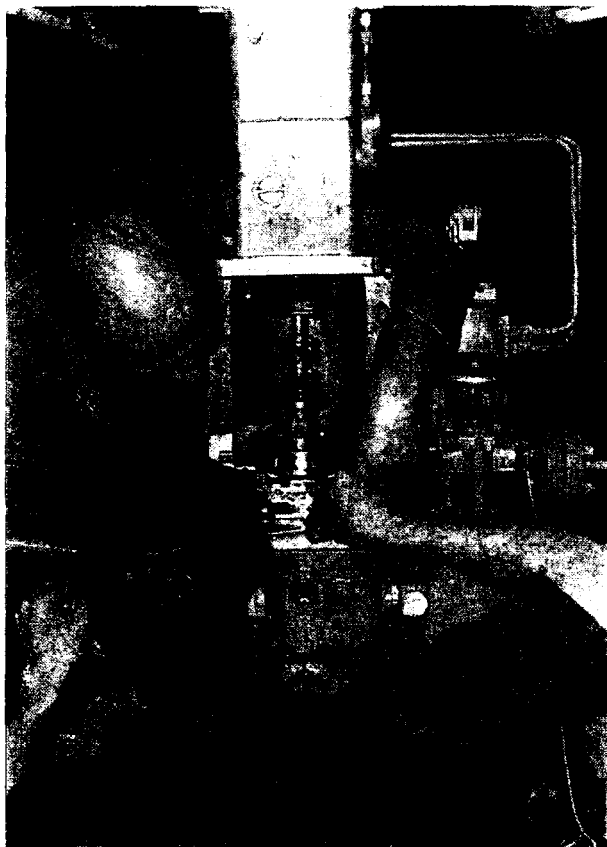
Y.150 MAIN EXTRACTION PUMP—TAKING AXIAL CLEARANCE
